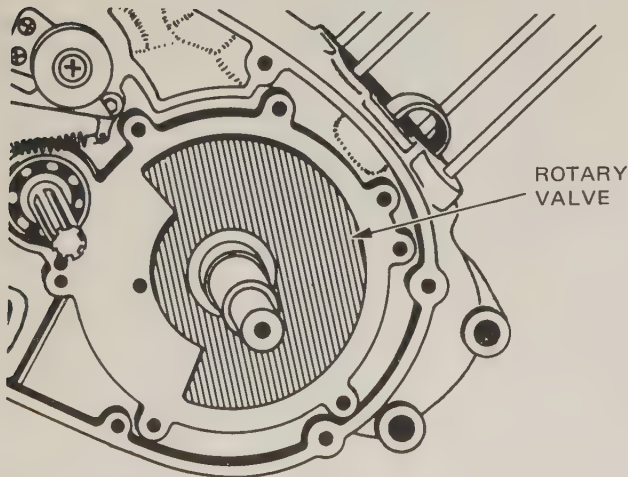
Carburetor and side cover removed from engine to show rotary disk valve.
